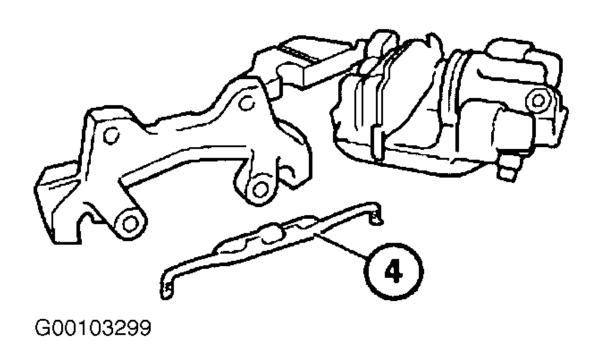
Identifying Retaining Spring Courtesy of BMW OF NORTH AMERICA, INC.
